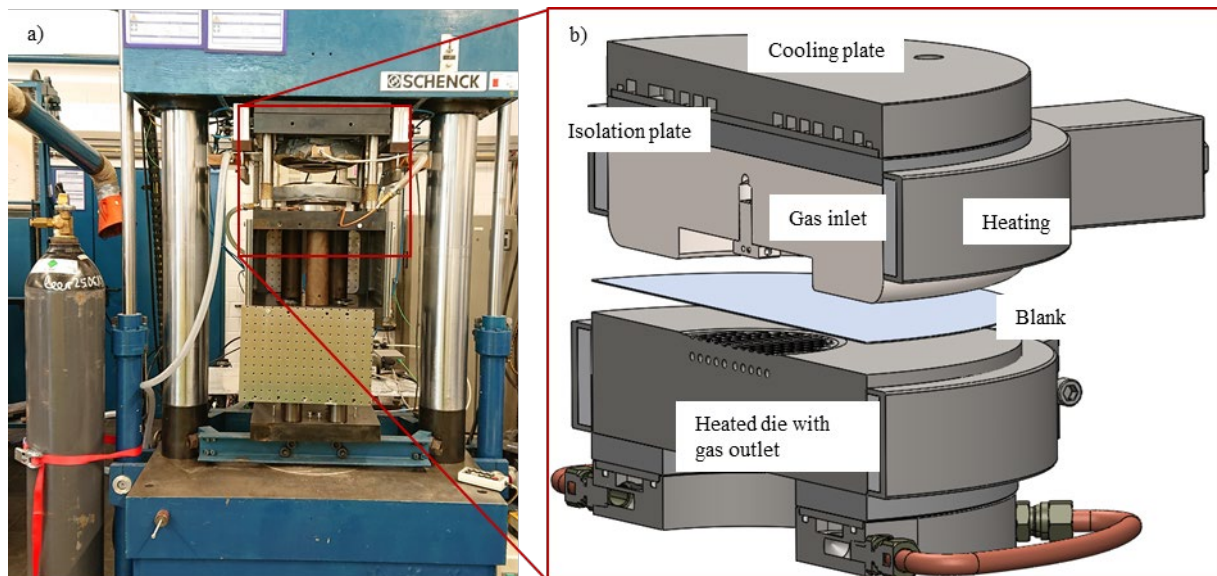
a) Schenck hydraulic press with HMGF tool insert b) CAD design of tool insert.
